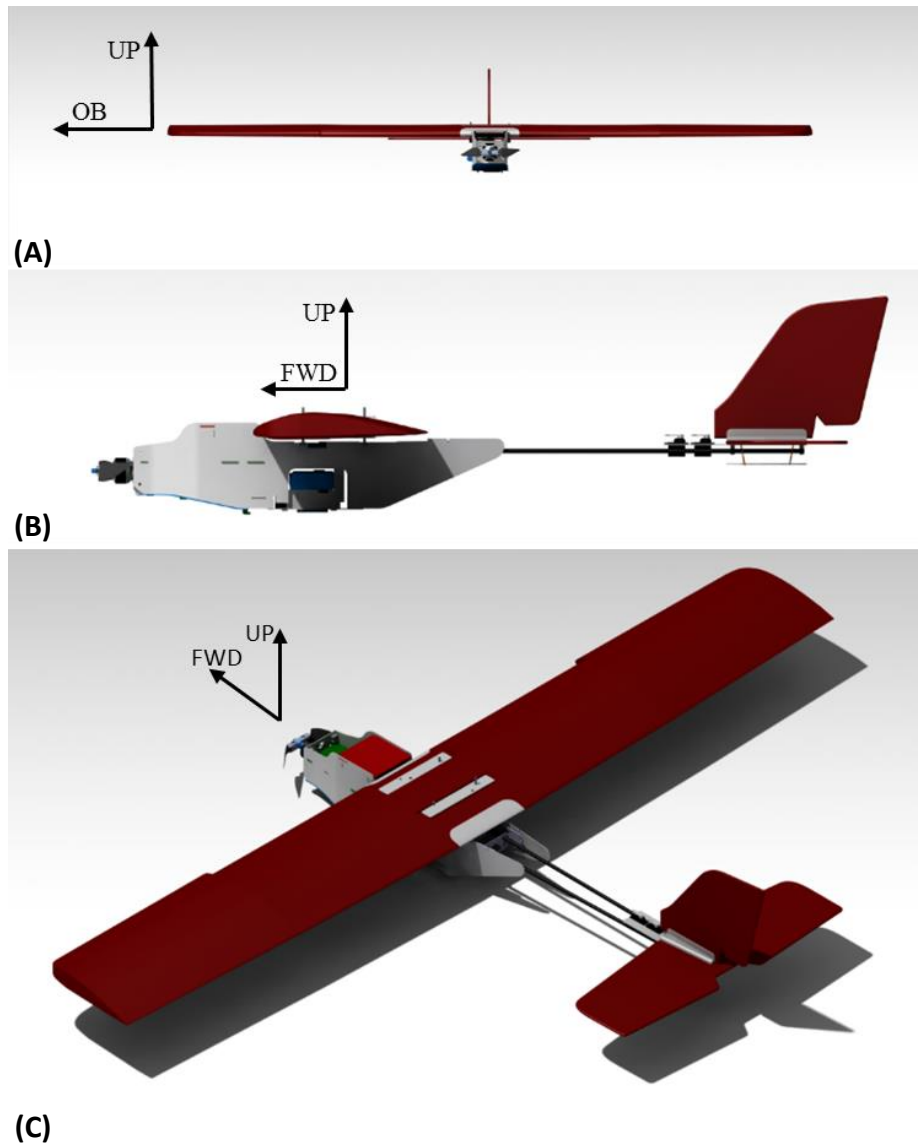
Fixed-wing UAS CAD model: (A) Front view, (B) Side view, and (C) Isometric view
